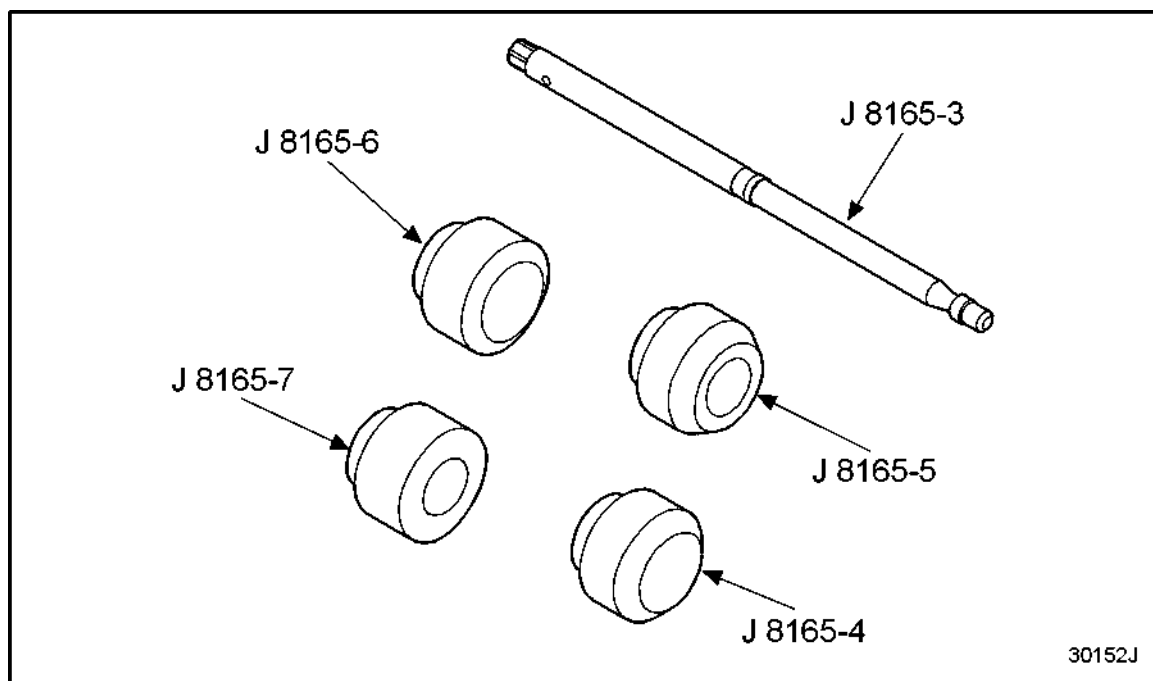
Valve Seat Concentricity Gage, J 8165-2
